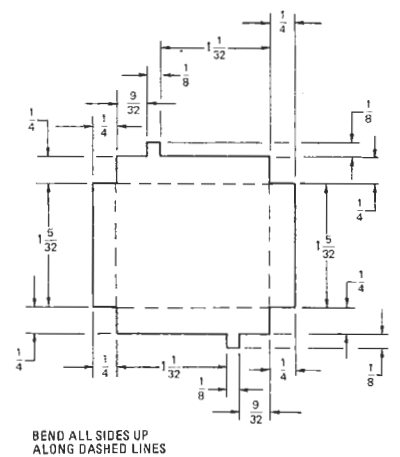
BOTTOM RF SHIELD is soldered to bottom of main PC board.
